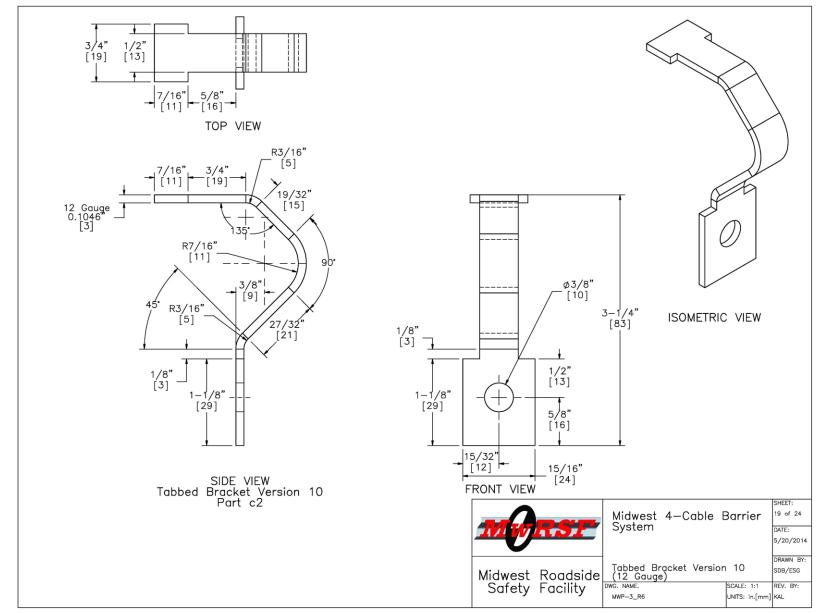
Bolted Tabbed Bracket V-10, Design Details
